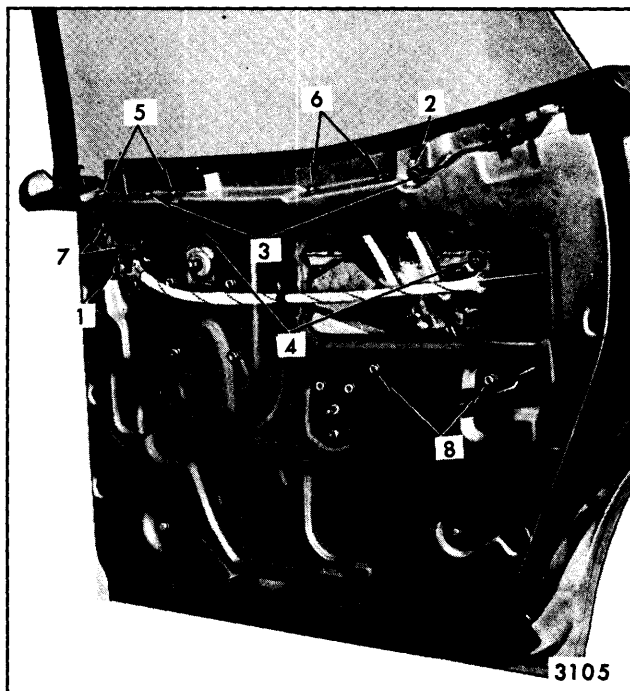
Rear Door Window Removal and Adjustments - "A-39" Styles
